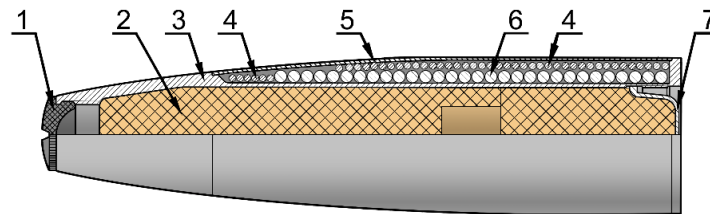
Main parts of the 128 mm HE warhead with a central detonating assembly: (1) fuze well closing plug, (2) explosive charge, (3) warhead body, (4) smaller steel balls, (5) liner, (6) larger steel balls and (7) warhead base
